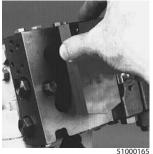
Remove Adapter Plate and Solenoid
